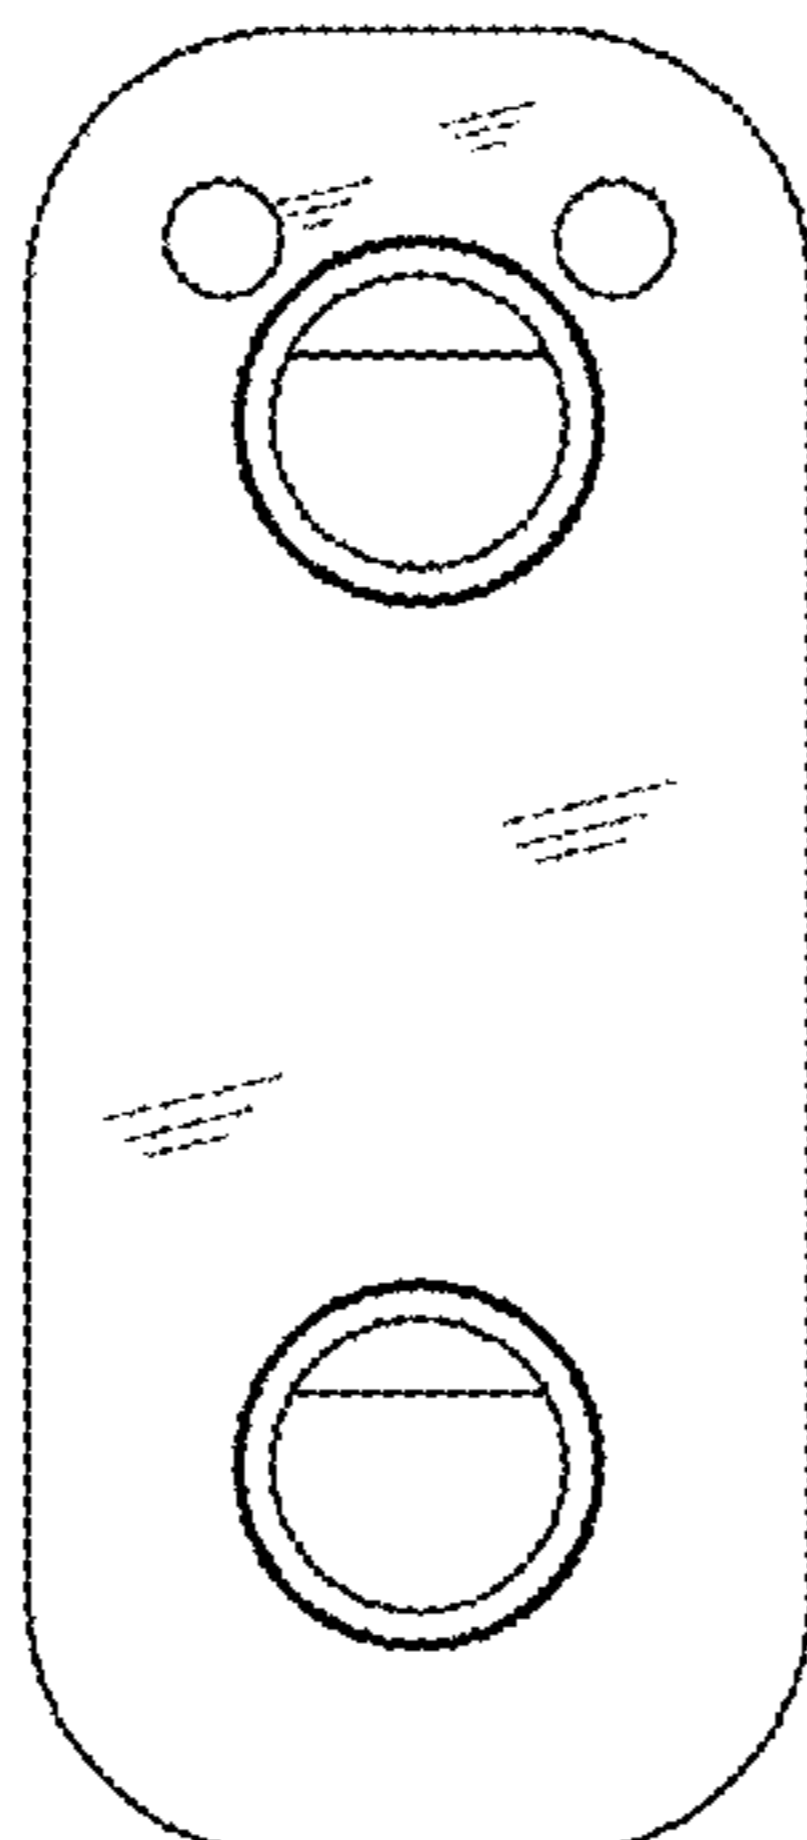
is a bottom plan view of the clip for stethoscope chestpiece attachments shown in FIG. 1;
